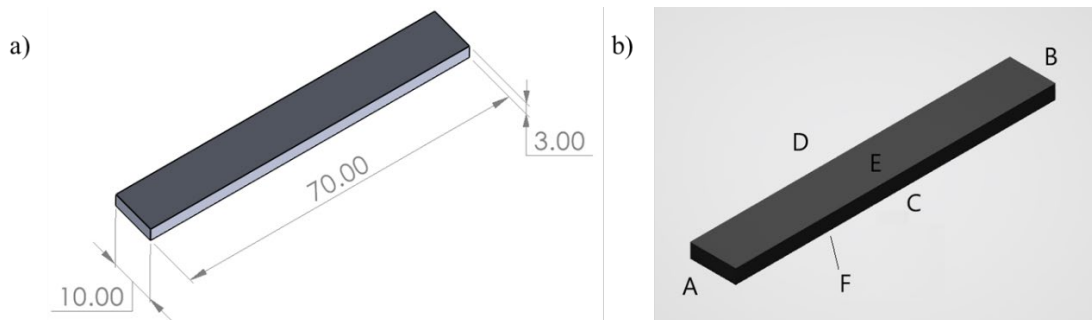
(a) Benchmark dimensions in mm; (b) Surfaces.
